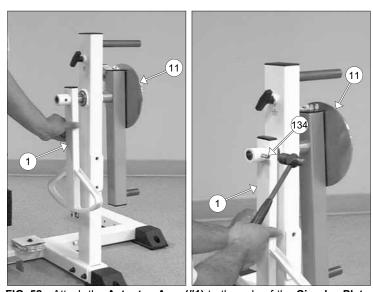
Attach the Actuator Arm (#1) to the axle of the Circular Plate (#11). Next, align the hole of the Actuator Arm (#1) to the hole of the Circular Plate with Axle (#11) and, using a hammer, insert the Roll Pin 3/8 X 1 1/2 (#151).
